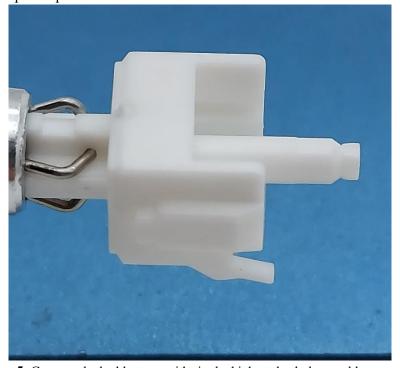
Center pole double taper with single, high set backplate mold sprue mark.
